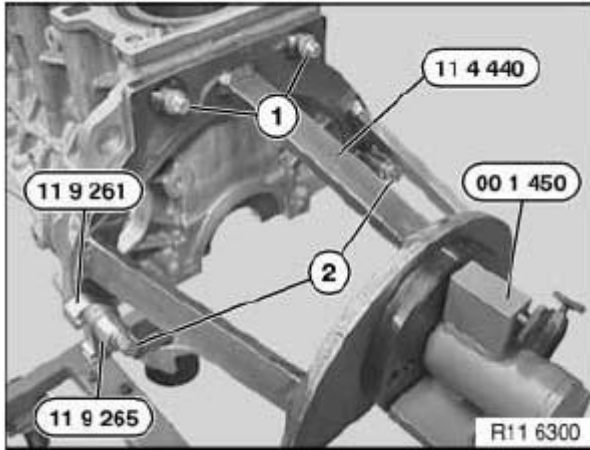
Identifying Special Tool (11 9 261), (11 9 265), (11 4 440), (00 1 450), Steel Bolts And Aluminium Bolts
